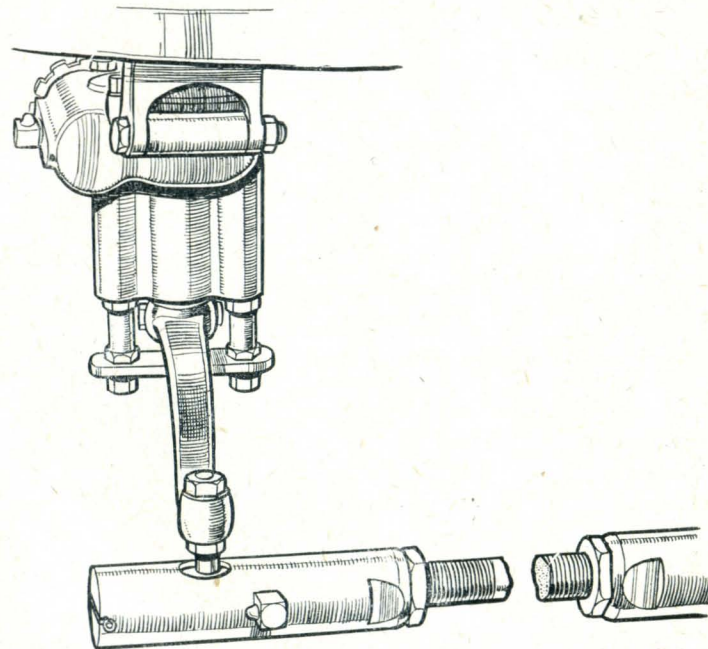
LOCK STOPS BELOW STEERING GEARBOX, AND ADJUSTMENT IN DRAG LINK FOR EQUALIZING THE LOCKS OF THE FRONT WHEEL
